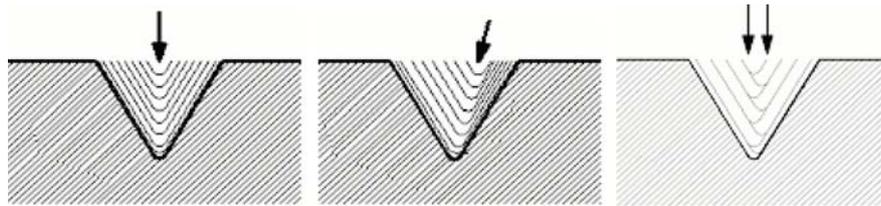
Infeed methods - Radial, Flank and Incremental. (Smith, 1989; Nalbant, *et al.*, 2008; Khoshdarregi and Altintas, 2015)
